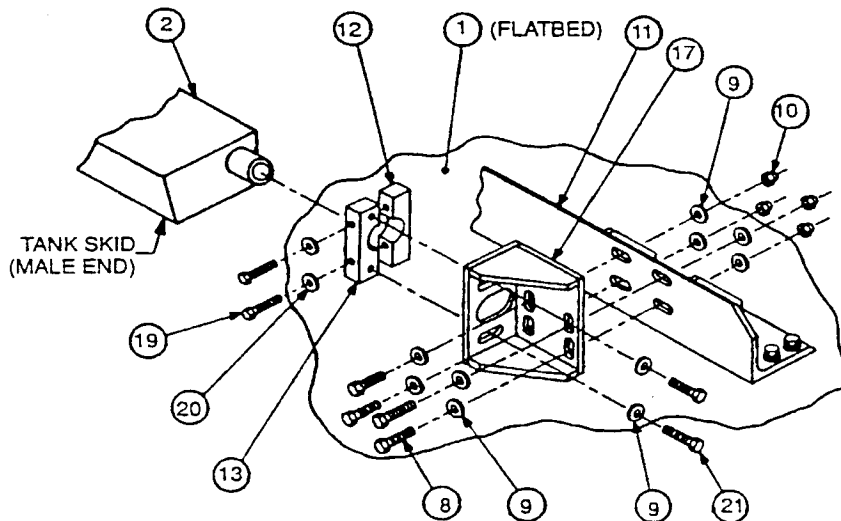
Angle/Bracket/Clamping Adapter Assembly.
